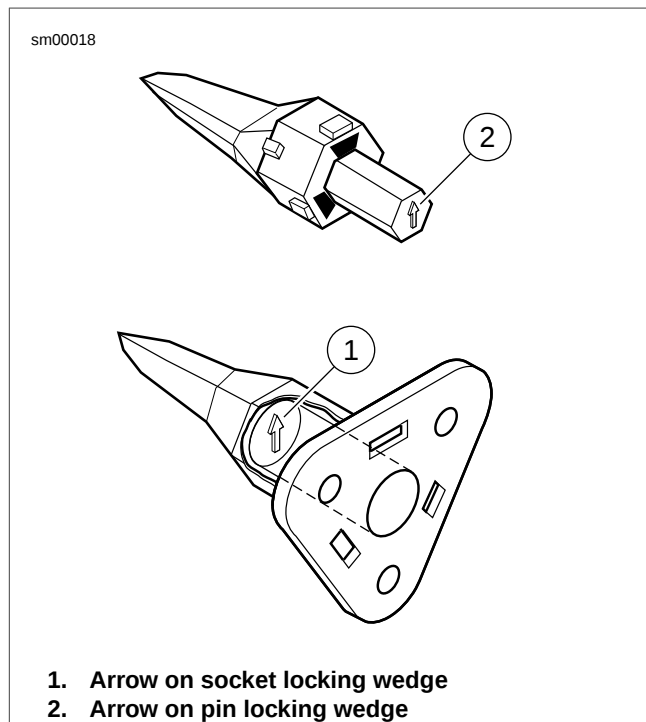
Deutsch DT Sealed Connector: 3-Place Locking Wedges
